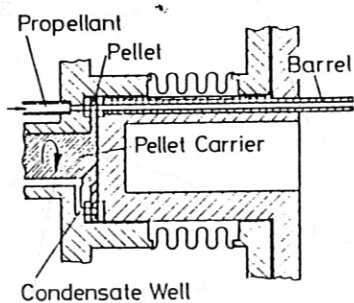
ORNL gas gun using a rotating pellet carrier.
